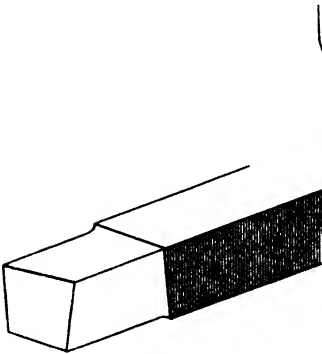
Tool Shank with End Shaped for Forming Correct Cutting Angles
